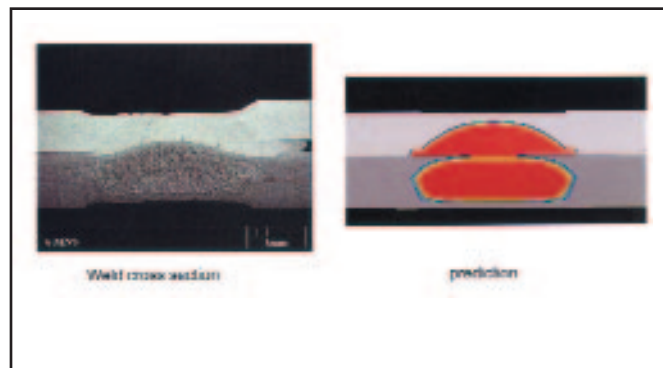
Weld structure at the end of the second welding pulse.
